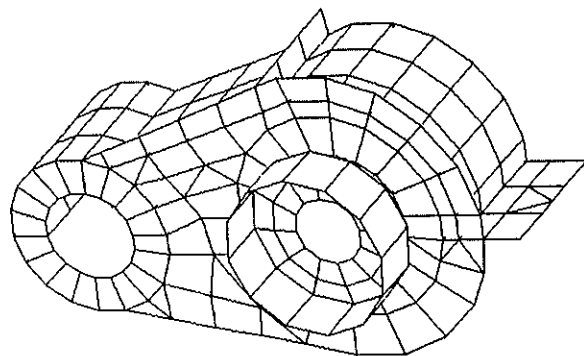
PLATE ELEMENTS, REAR QUARTERING VIEW
